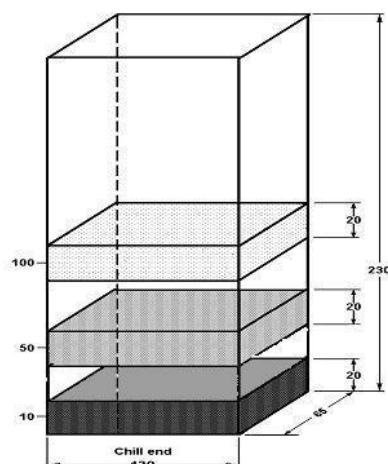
Schematic diagram of the end-chill casting (all dimensions in mm)
